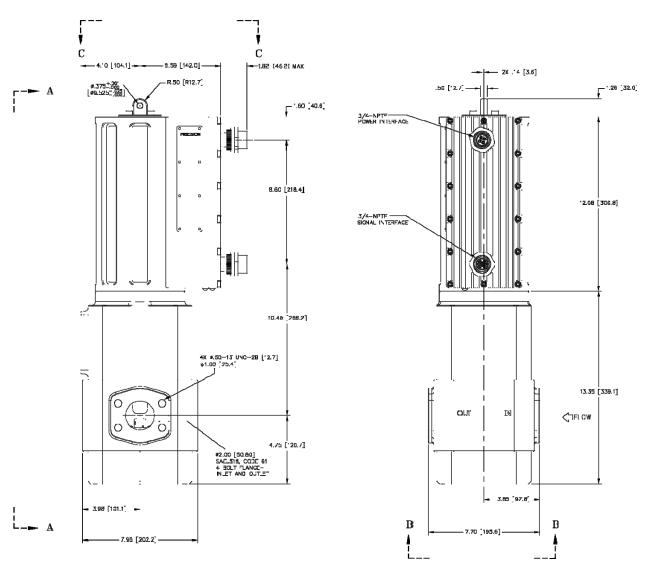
HFG2.0 Dimensions, 3-Piece Housing
